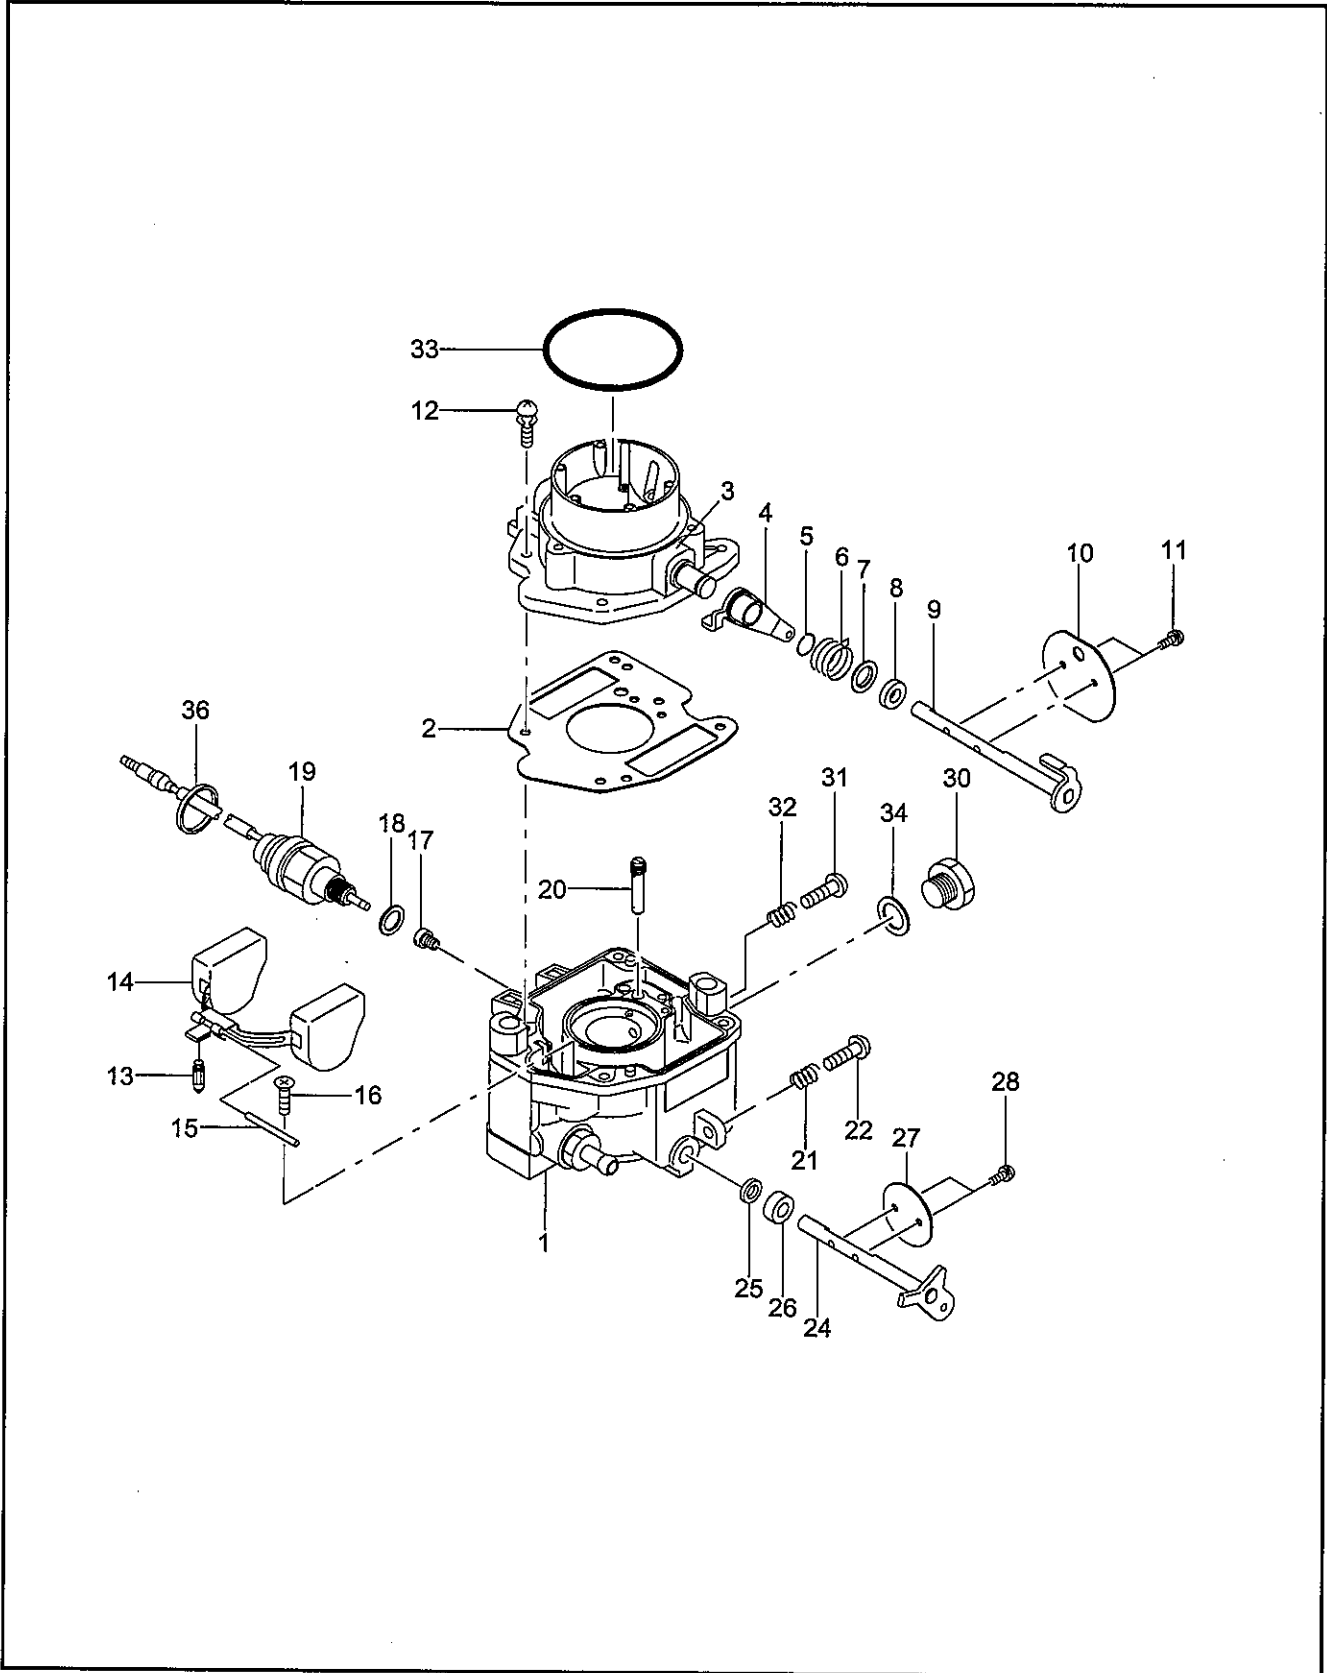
CARBURETOR GROUP(AUTO CHOKE TYPE)
